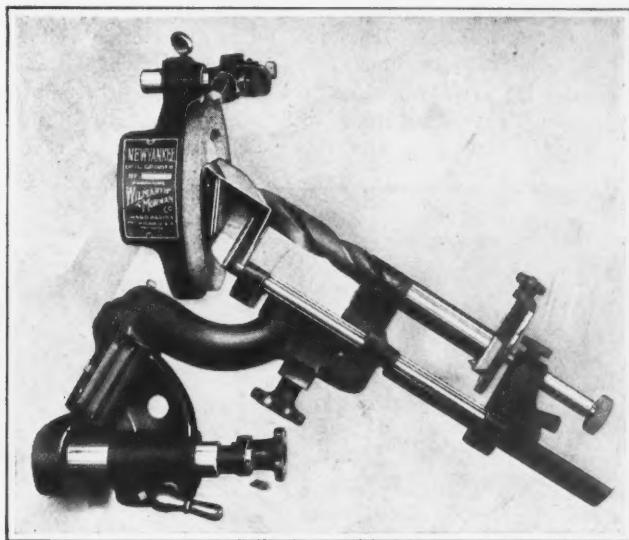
Manner of holding Long Straight-shank Drill during Grinding Operation
